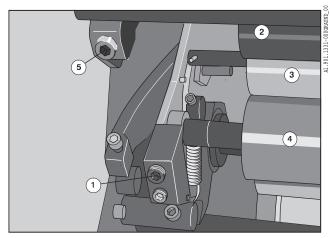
Adjusting the 2nd to 4th ink transfer rollers
